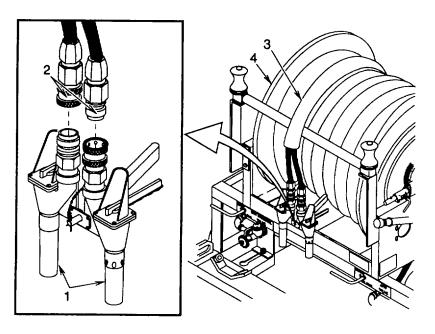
Unwind Hose Assembly From Trailer Mounted Extinguisher Assembly
